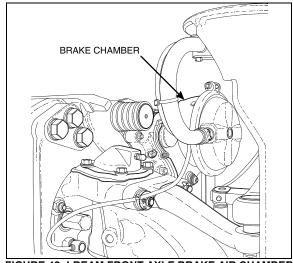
I-BEAM FRONT AXLE BRAKE AIR CHAMBER
